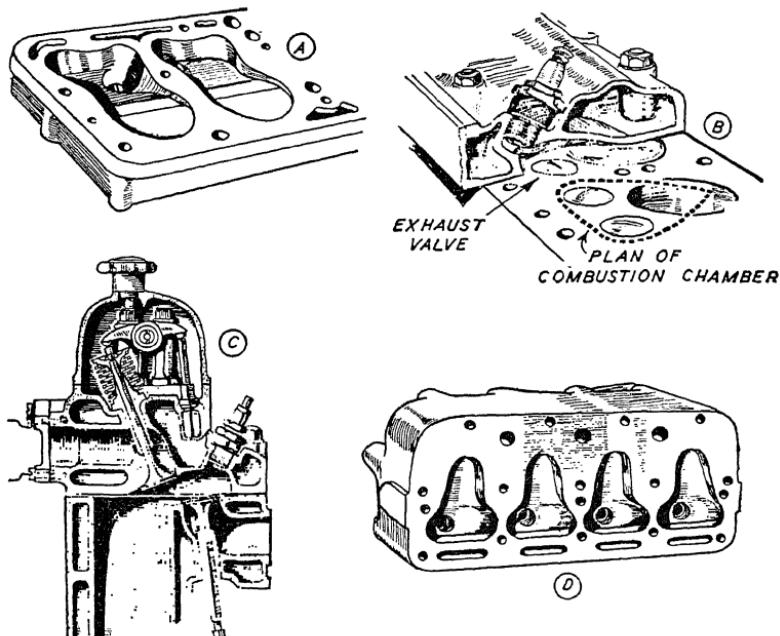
Cylinder Heads are Designed to Promote Turbulence and Decrease Pinging. A—Head With Ricardo Characteristics; B—Head With Shaped Combustion Chamber; C—Head Engine; D—Turbulence Producing Design.
